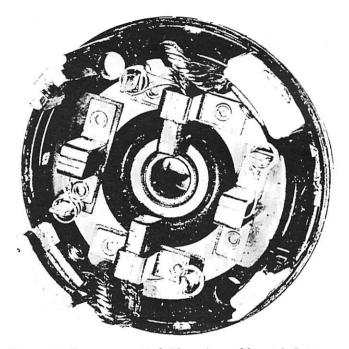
Commutator End Plate Assembly with Springs and Brushes in Place
